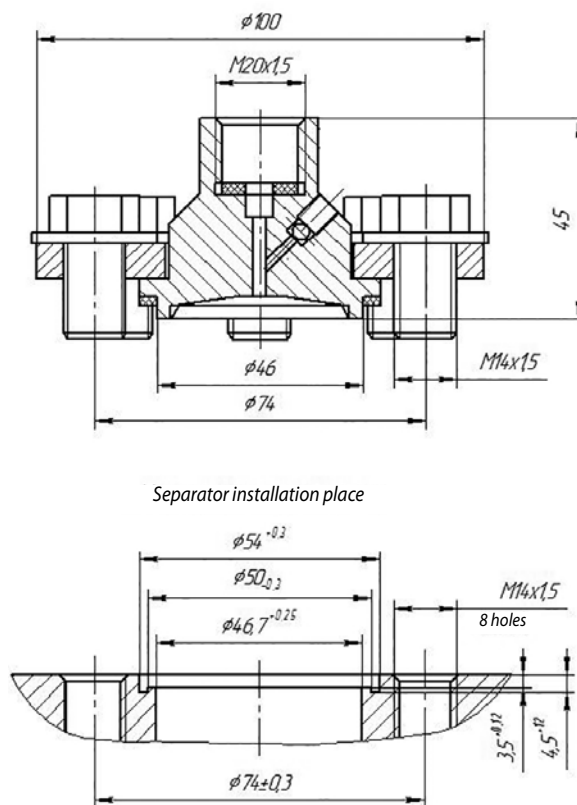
Design, overall and attachment dimensions of PM 5321
